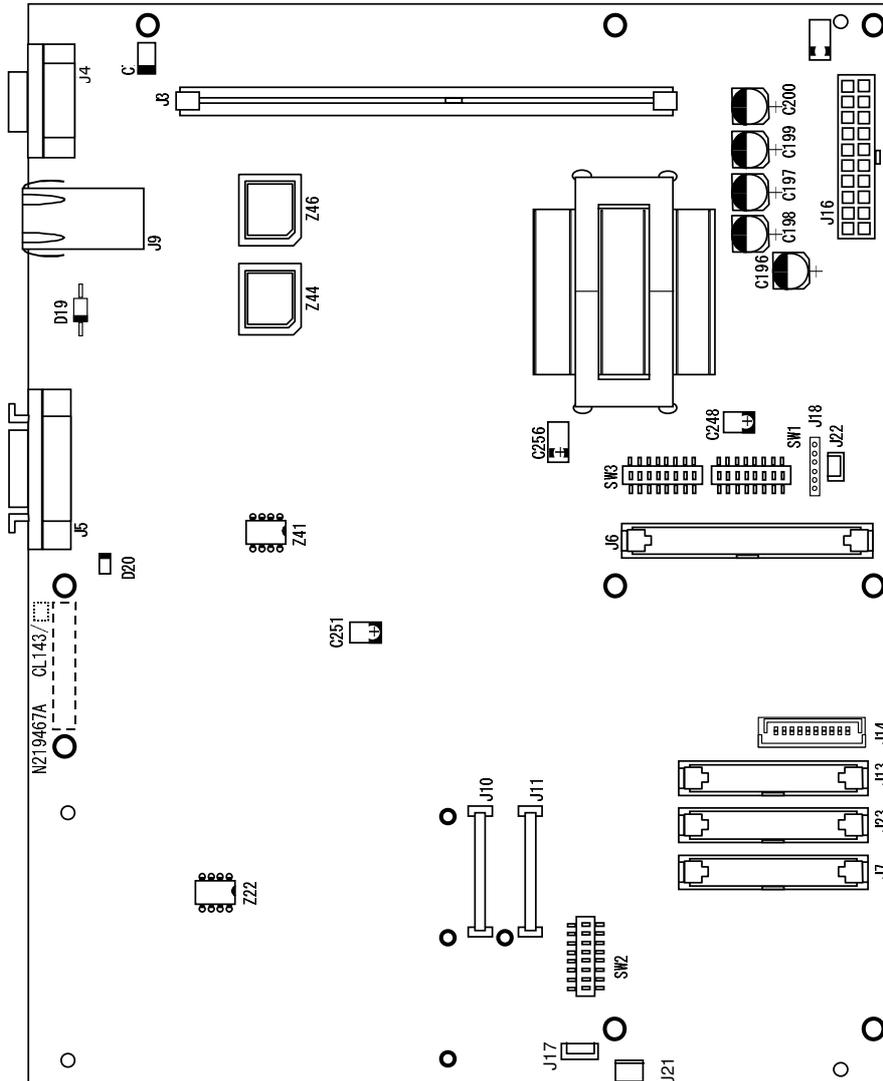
Controller Board Layout (CL143/CL144)
